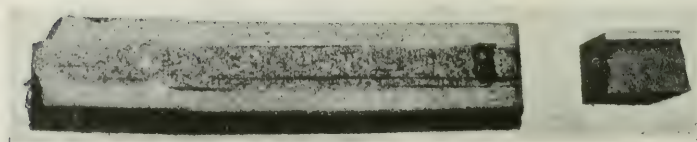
Sheet steel fractured in use. (FRÉMONT.)
